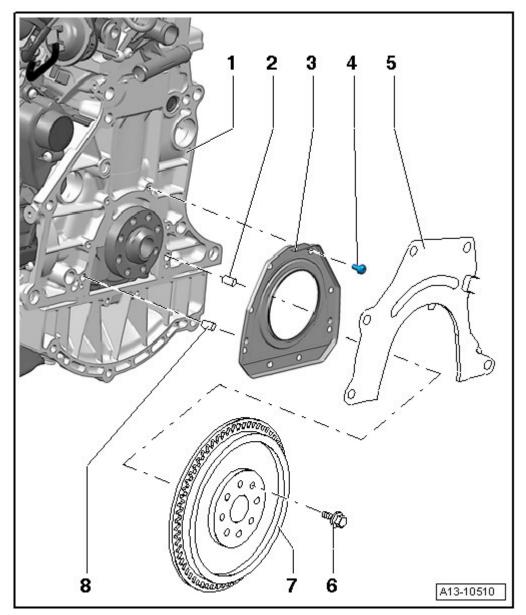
Identifying Sealing Flange And Dual Mass Flywheel Assembly Overview Courtesy of VOLKSWAGEN UNITED STATES, INC.
